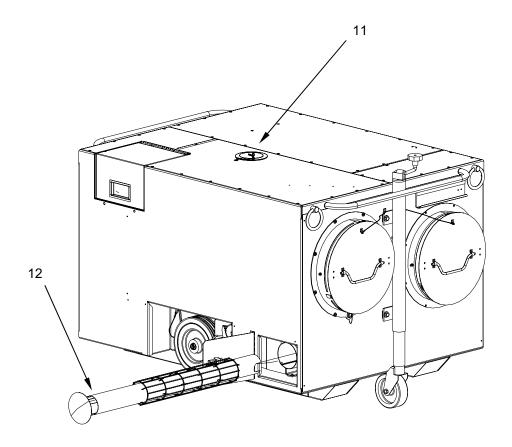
Exhaust Tube, Heat Exchanger (Sheet 3 of 6).
